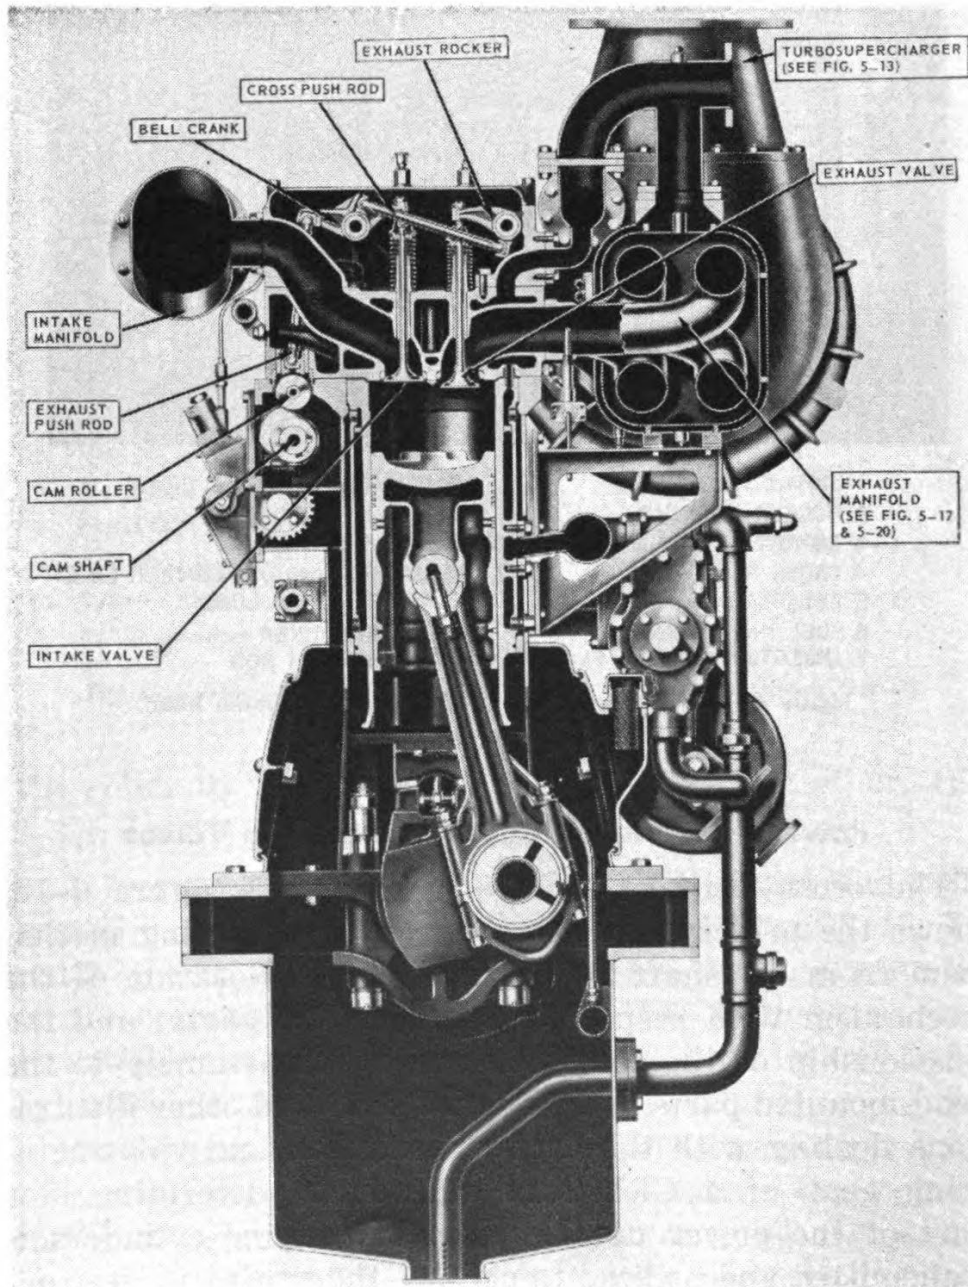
Sectional view showing valve gear from camshaft to valves (Cooper-Bessemer, GSB-8).
